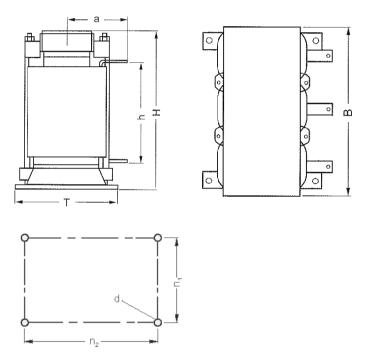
Dimension drawing, motor reactors 85 - 200 A
